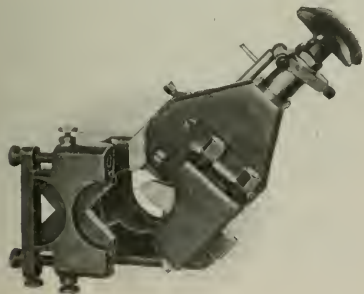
Standard Turning Tool for Bar Stock and Forgings.
